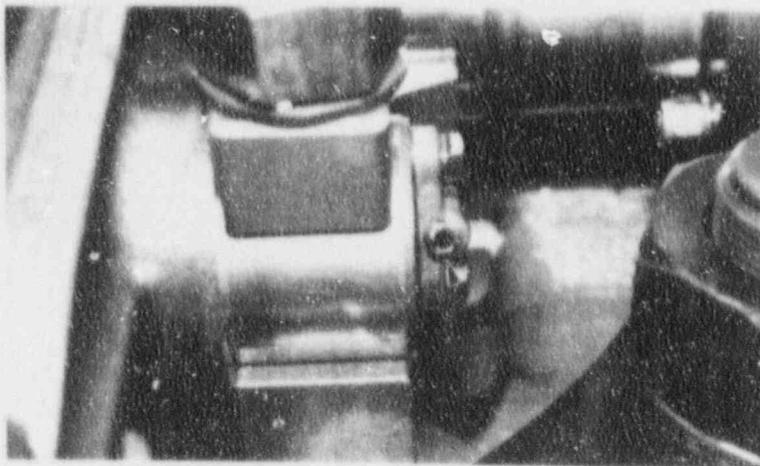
View of the rocker arm end of the broken oil line that provided oil from bearing cap number 1 to the rocker arm assembly of cylinder number 20. The arrow points to the fracture surface. The oil line failure was considered a secondary event, as a result of the bearing cap coming loose.
